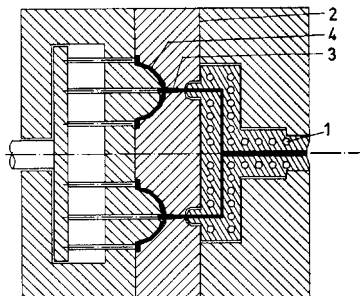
Multi-cavity cold runner injection mold with a cold runner system
